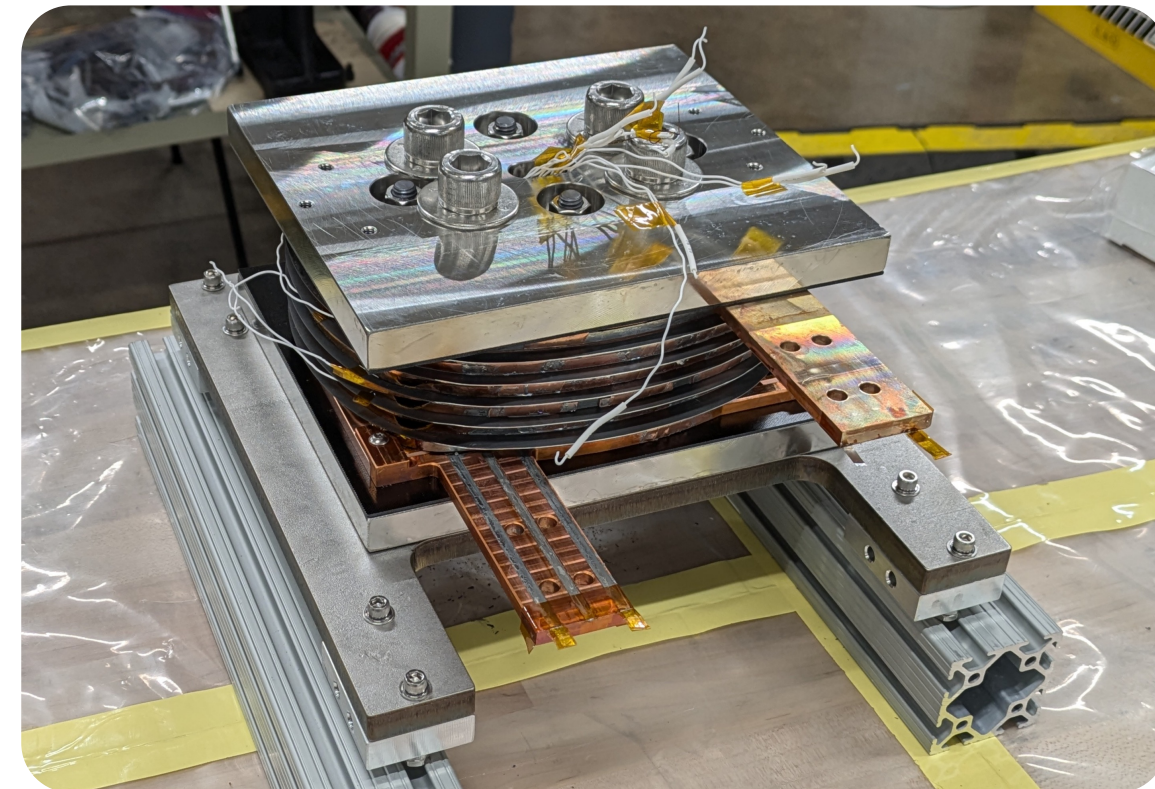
The Zethus winding pack after being fully assembled on the bench.
